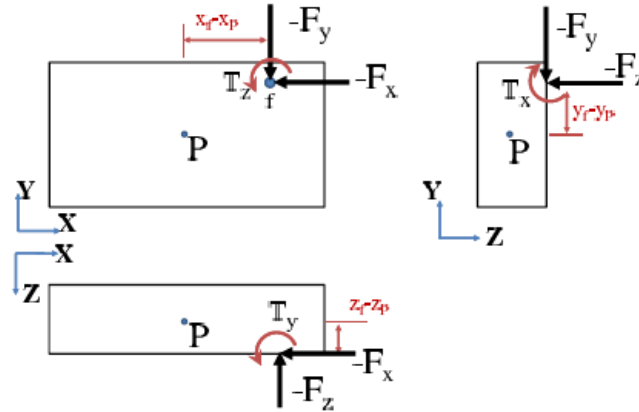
Isometric view of workpiece-baseplate assembly under load (Butt, 2012)
